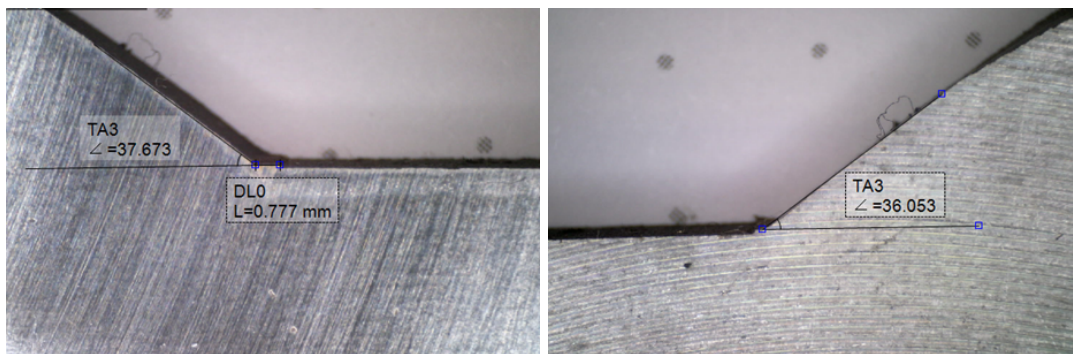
Macroview on the fracture surface of specimen tested for 30° (initial crack length – notch+precrack=20.023 mm /max 20.032)
